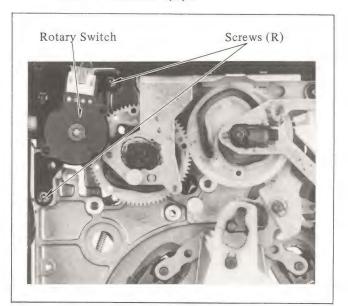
Assembly and Adjustment of Gears and Rods-(11)
